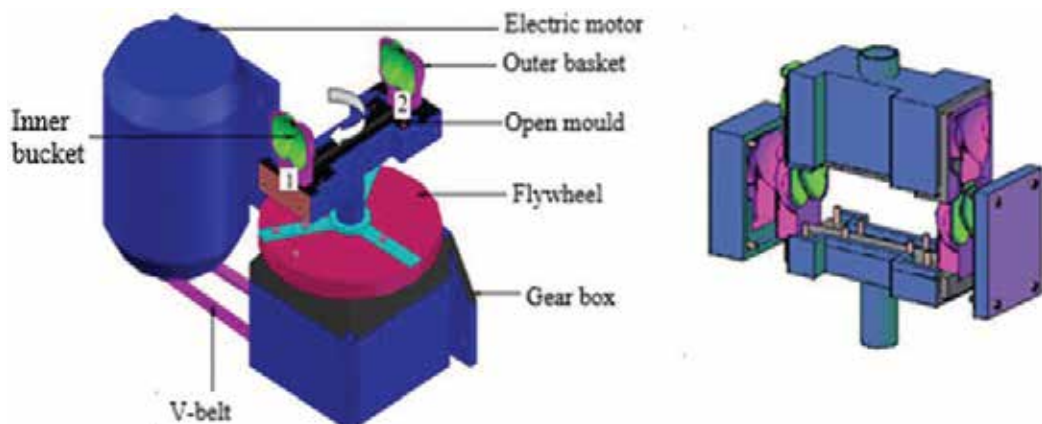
Centrifugal casting machine showing the configuration of the mould [57].
